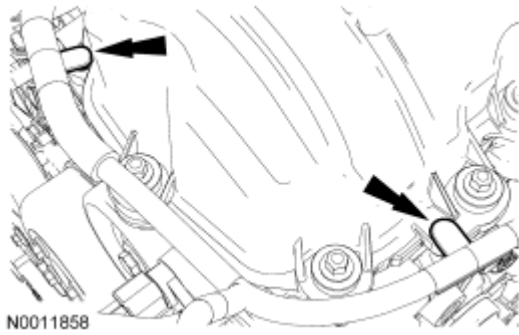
Locating Engine Wiring Harness Pin-Type Retainers
